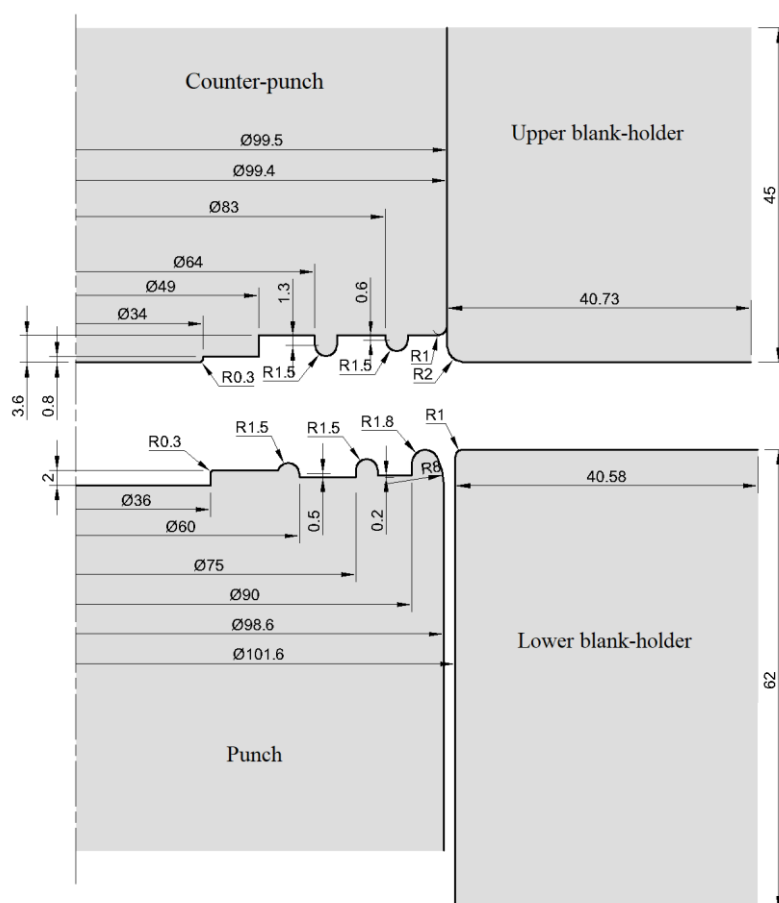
Deep-drawing tooling assembly. Dimensions in mm.
